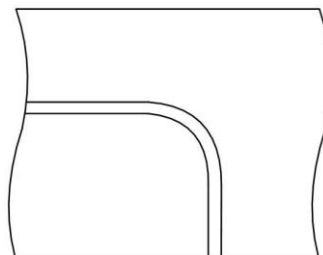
(6)-1 Weld Seam Tracking Specimen
